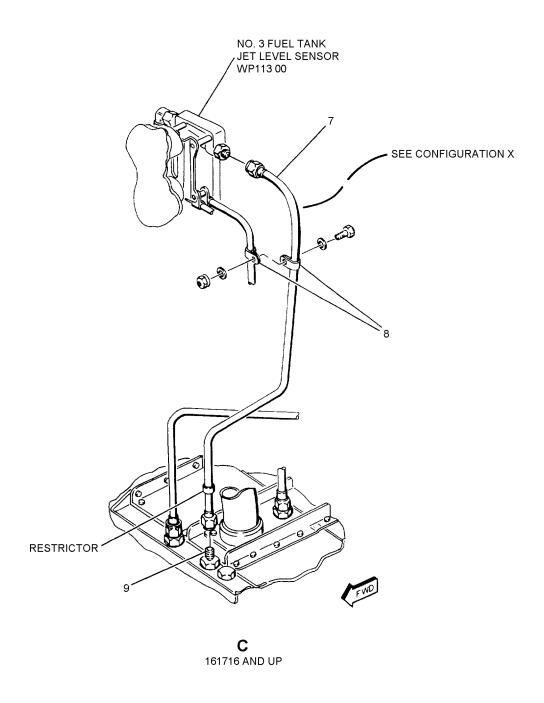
No. 3 Fuel Tank Level Sensor Tube Restrictor (5RAP668) (Sheet 3)
